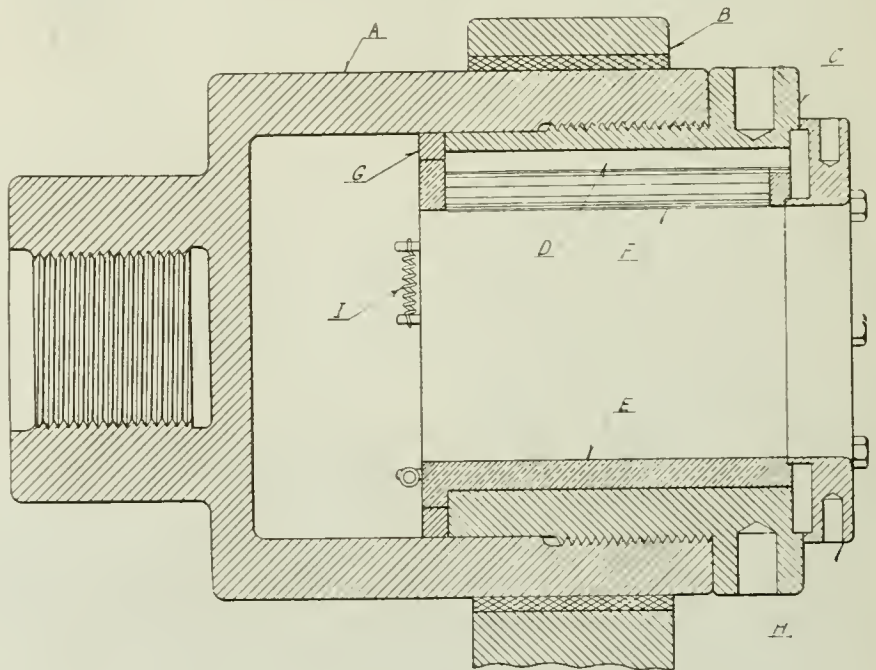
ROLLER CHUCK FOR 6-INCH SHELL.
